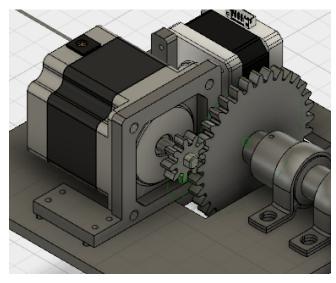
A close up of the model of the 3D rotator motor and gears assembled with our final design.
